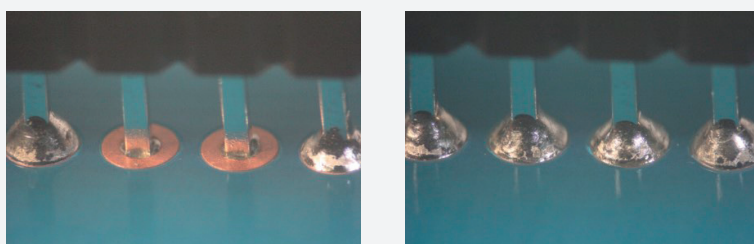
Left side: Result of Through-Hole-Soldering with conventional solder wire. On the right, the result of Through-Hole-Soldering with Almit solder wire SRS-ZL.
